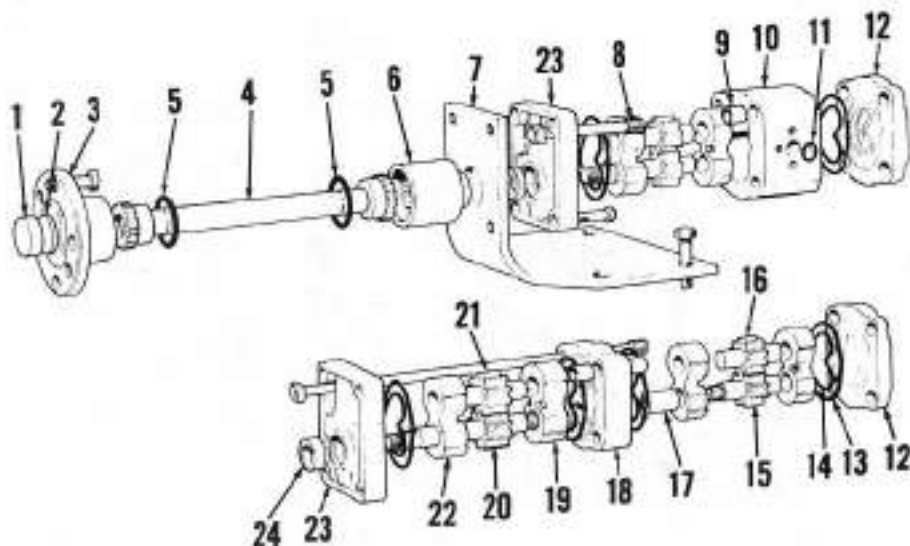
Exploded view showing construction of both the single and dual pump assemblies for Model 1200. Pump drive components and mounting bracket are also shown; pump is mounted in front of radiator (see Fig. 195) and is driven from engine crankshaft through shaft (4).
